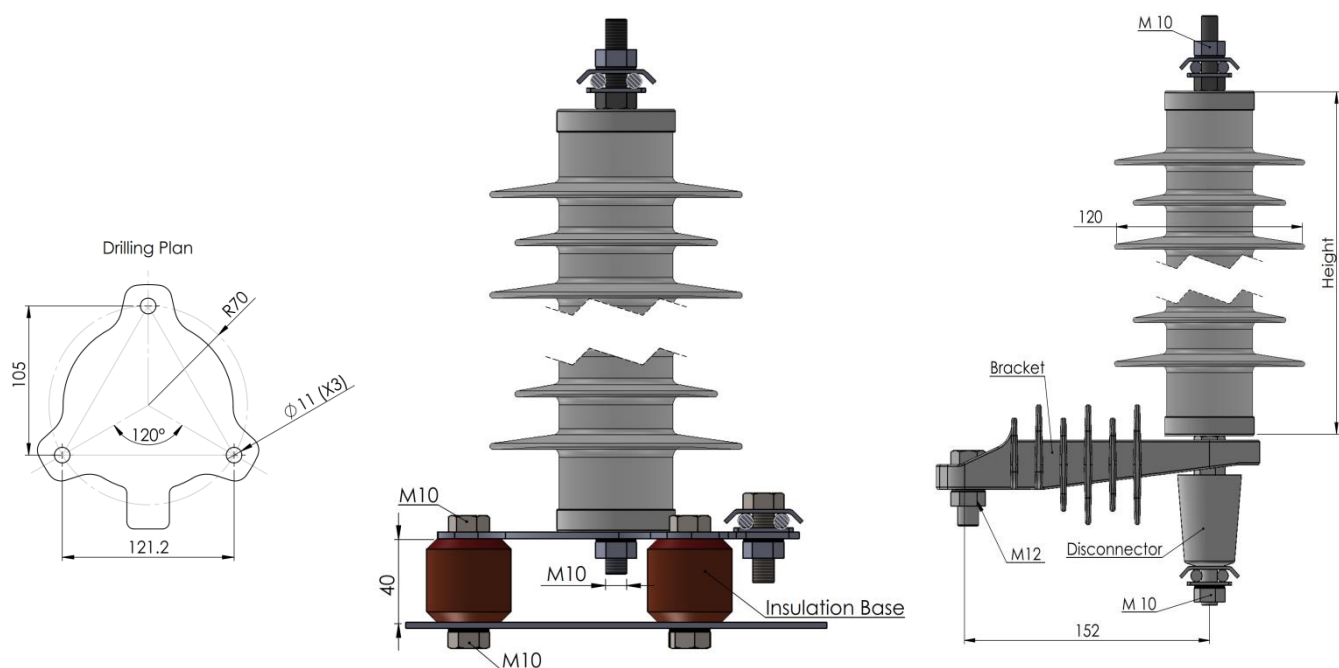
Outline drawing of Pedestal Mounted & Bracket Mounted ETM
